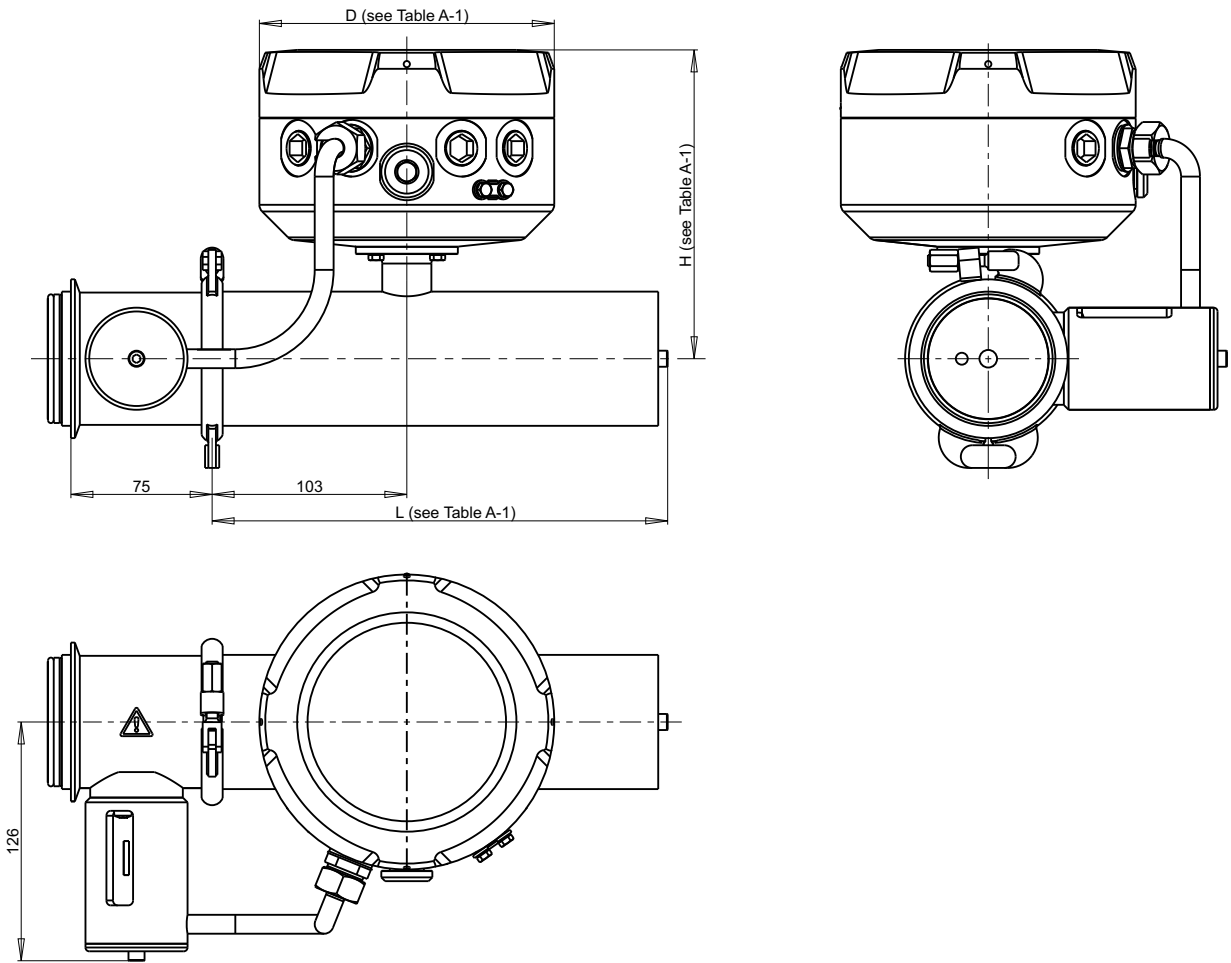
Dimensions of the Inline Pump 300 Ex d with VARIVENT[®] N flange and sensor
